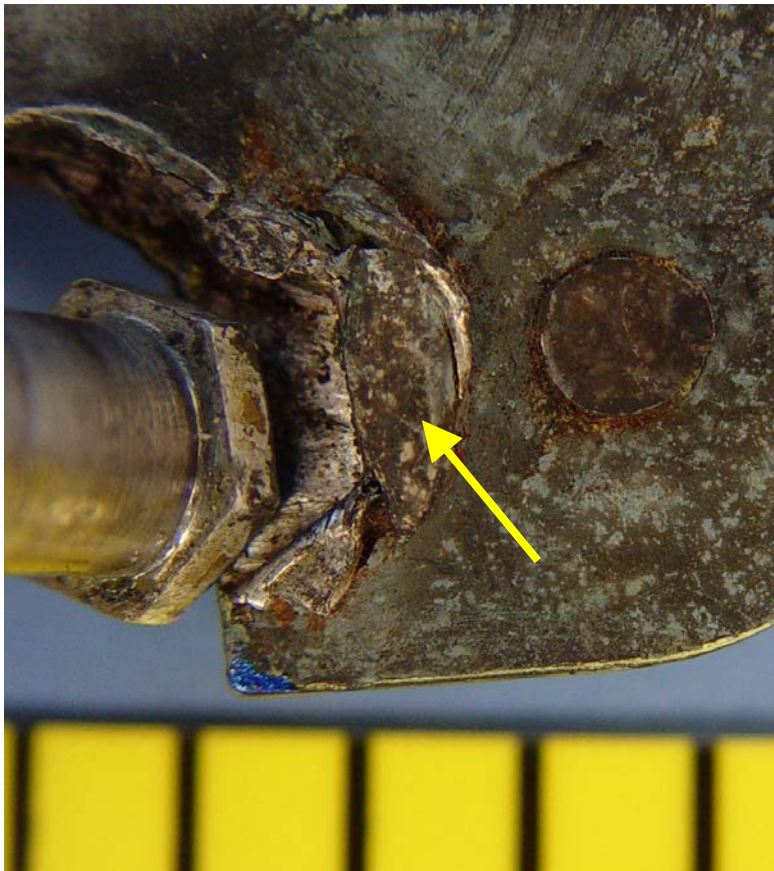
Damage to lower, aft edge of right, upper stabilizer fitting
